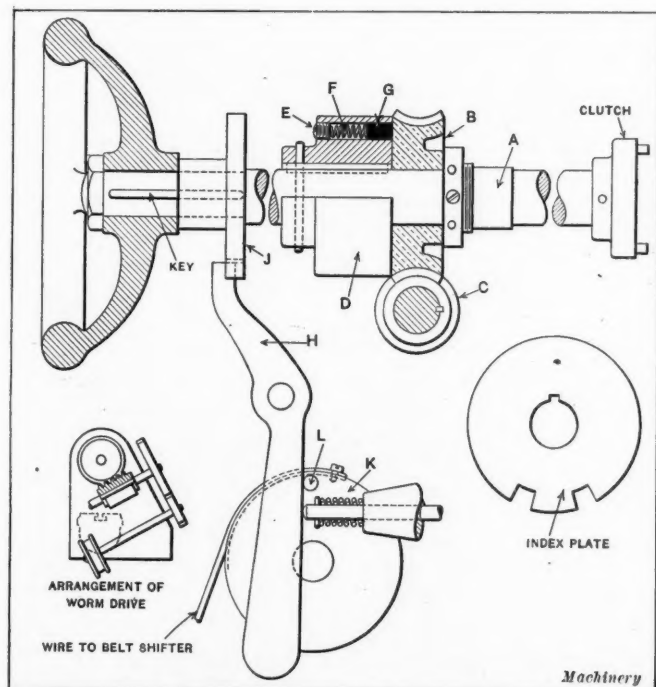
Arrangement of Friction Feed Mechanism on Powder Train Groove Roughing Machine
